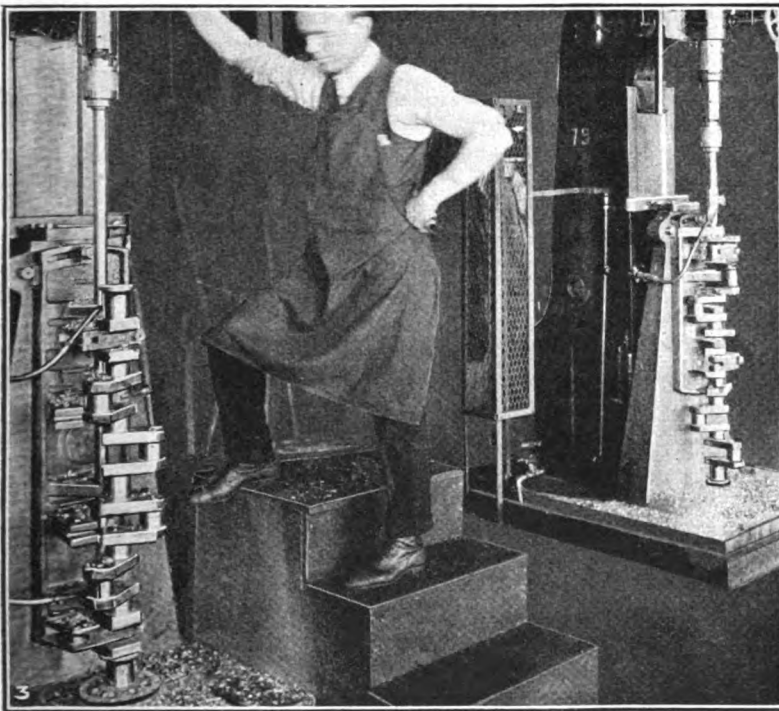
DRILLING FOR LIGHTNESS. FIG. 4. DRILLING FLANGE HOLES
